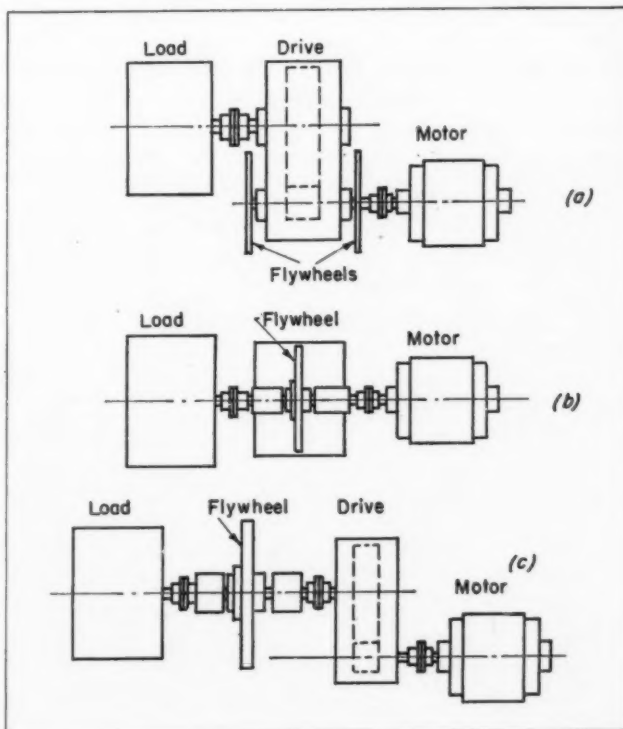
Various possible locations of motor, flywheel, drive and load. Flywheel should preferably be located on high-speed shaft, such as at *a* or *b
